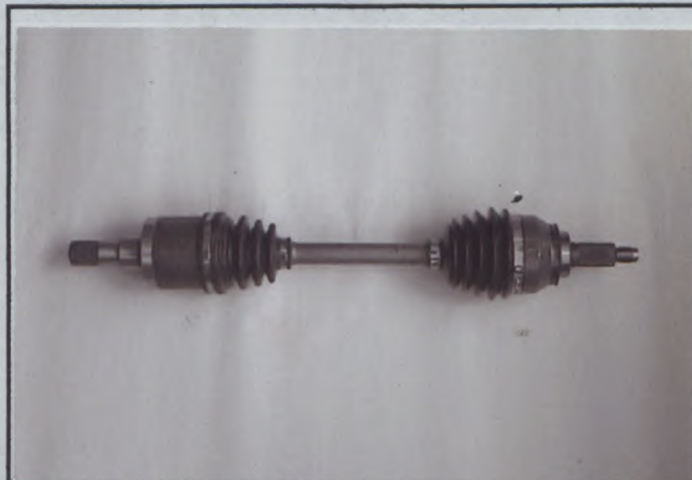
REINFORCED DRIVE SHAFT B (RH)
